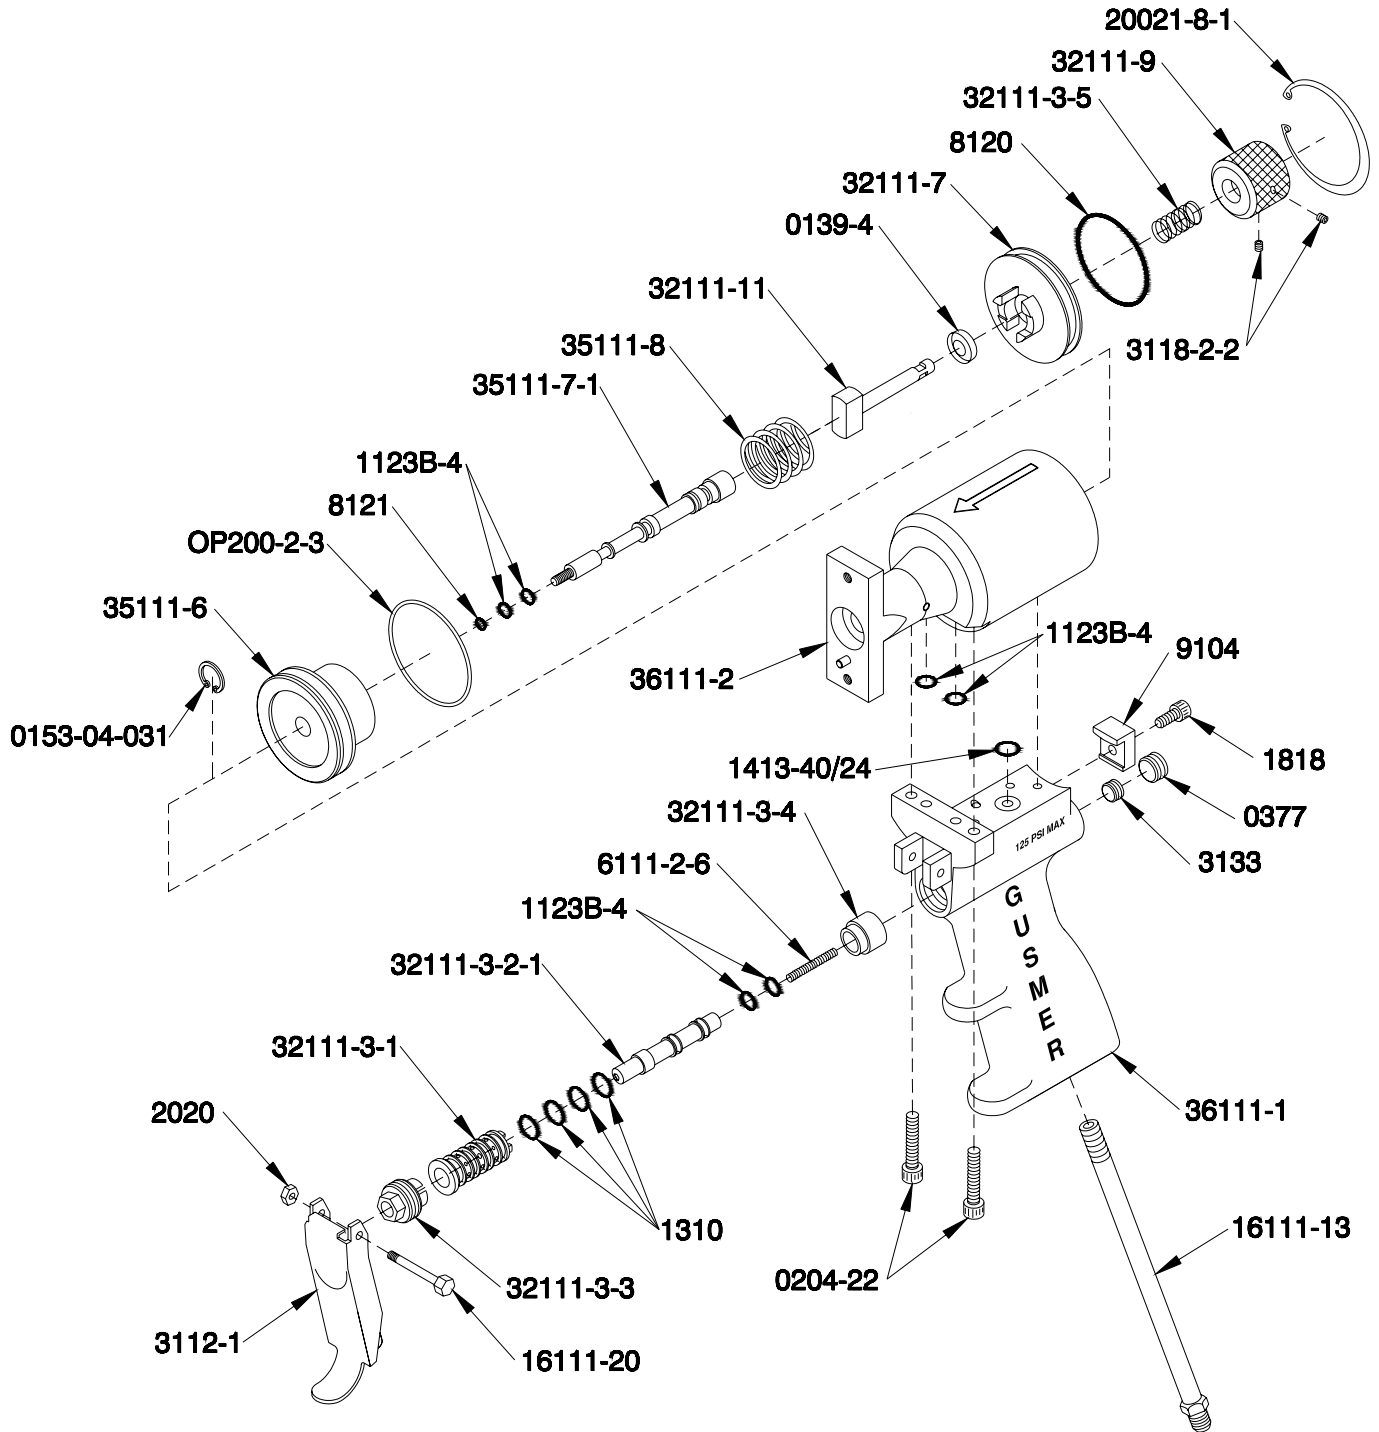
Handle Assembly (Part No. 36111), Exploded View
